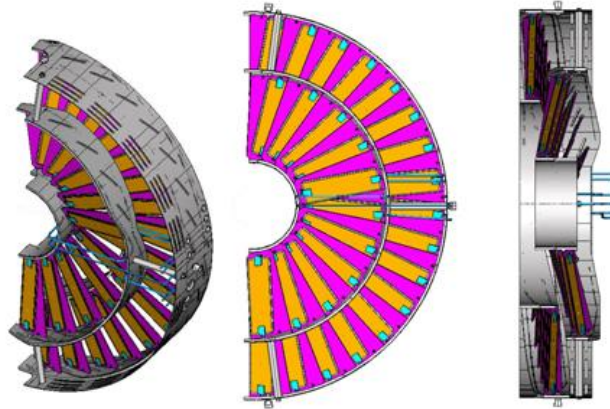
FPIX Upgrade half-disk design: Inner Blade assembly supported by Outer Blade assembly, with all blades attached permanently to the C-C assembly rings.
